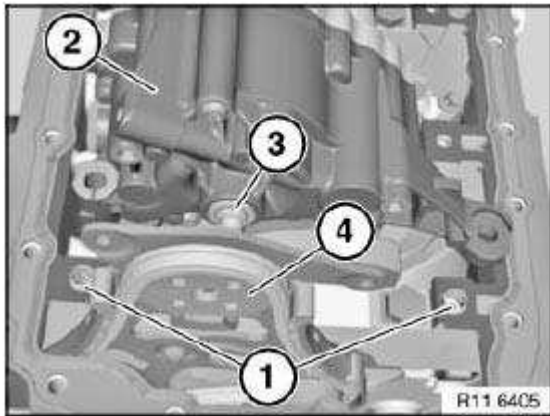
Spacers, Oil Pump And Sprocket Wheel
